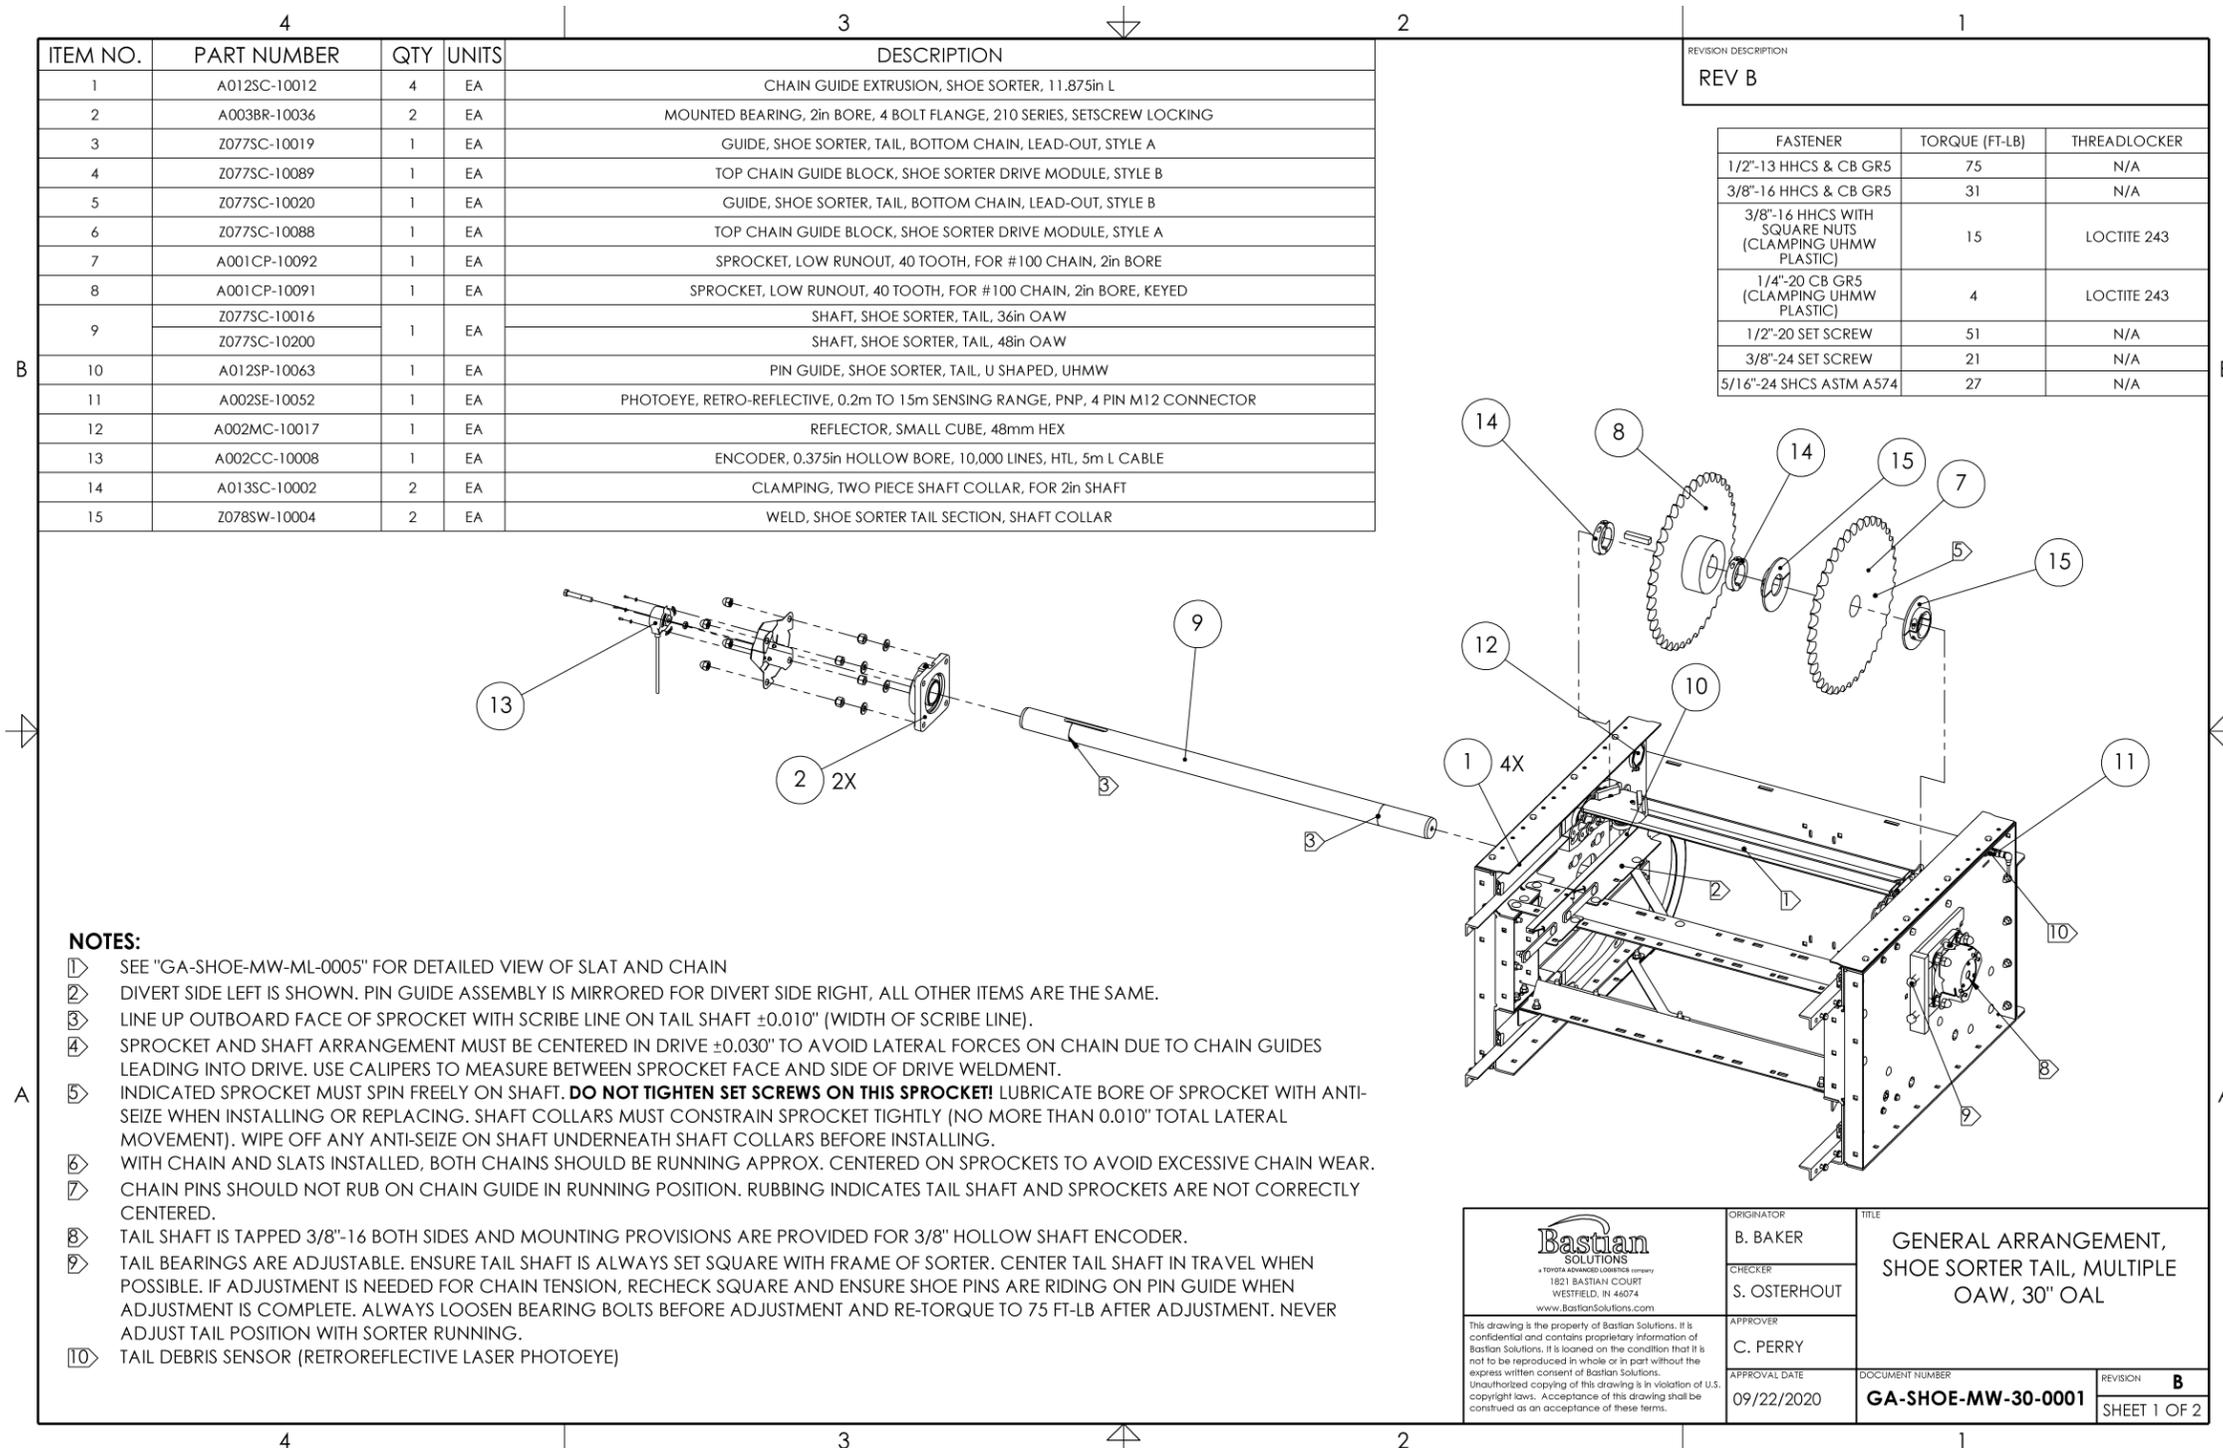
General Arrangement, Shoe Sorter Tail, Sheet 1 of 2
